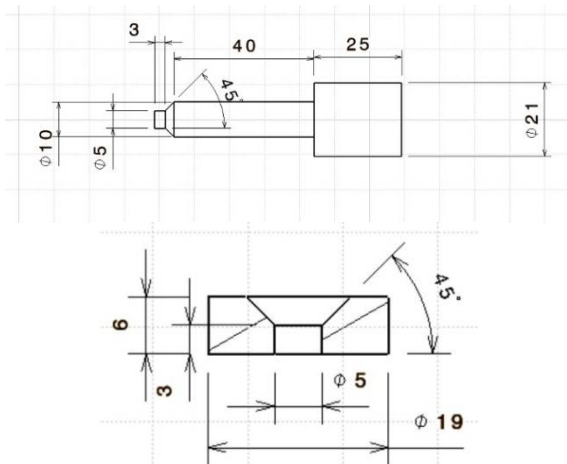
Dimensions and measurements of punch and die using forward extrusion
